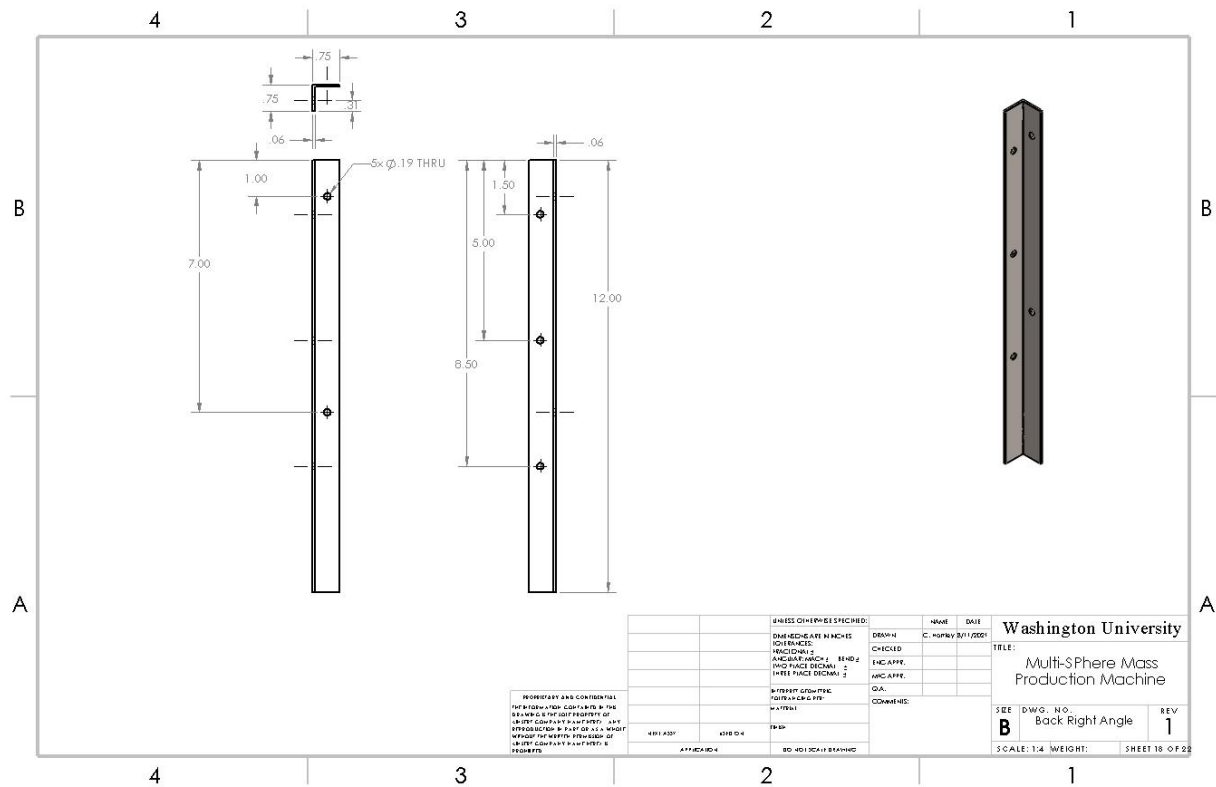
Engineering Drawing Hopper Join Back Right Angle
